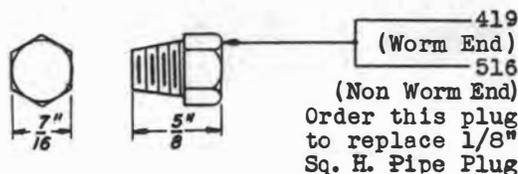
Drain Plug - Hex. H. Pipe Plug
